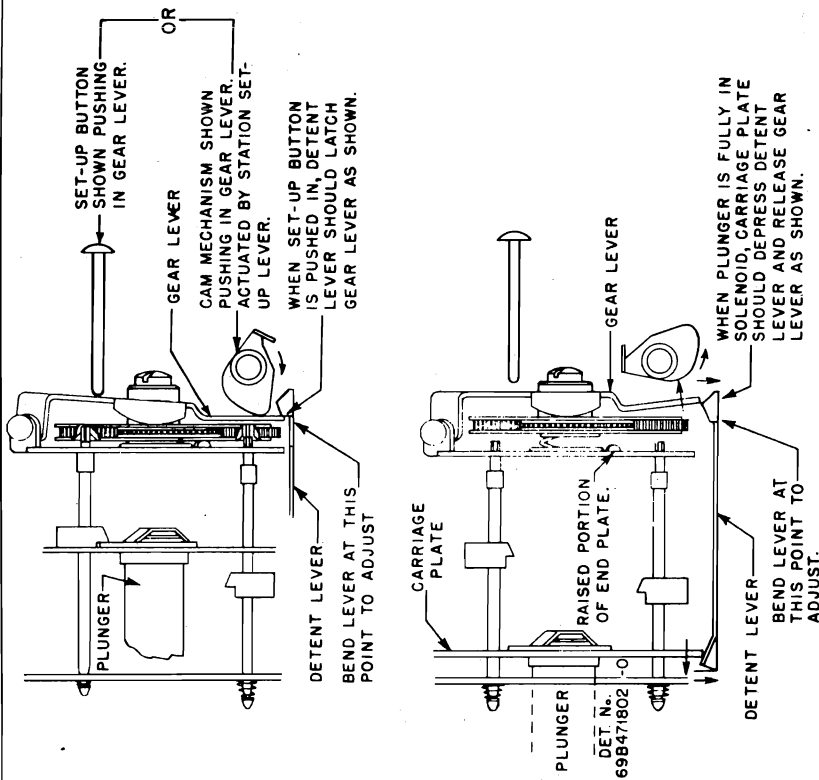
GEAR LEVER LATCH ADJUSTMENT
